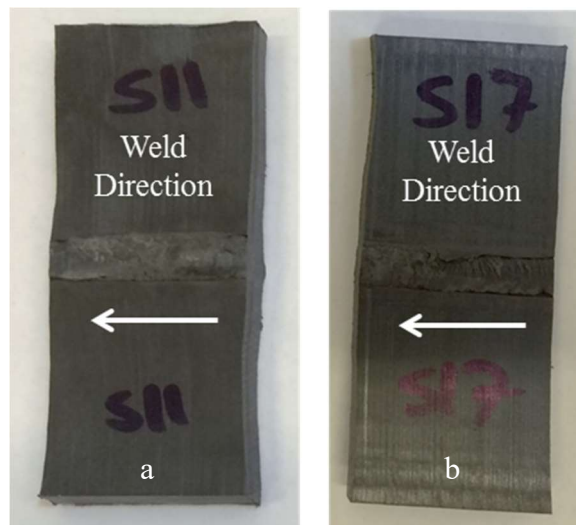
Snapshot of welded PEEK samples with welding parameters: (a) 900 rpm and 50 mm/min (b) 1000 rpm and 75 mm/min
